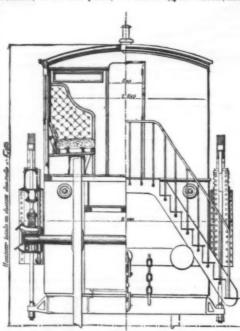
CROSS SECTION AND REAR VIEW OF PASSENGER CAR.
